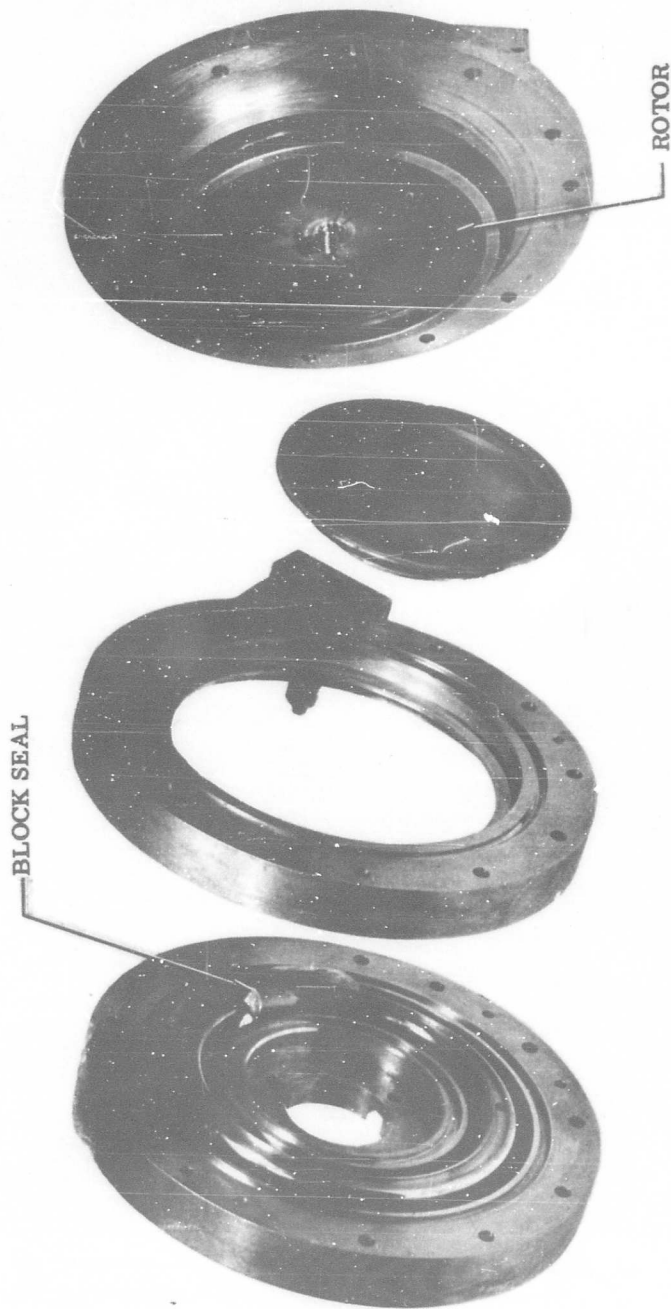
EXPLODED VIEW OF TURBINE COMPONENTS
